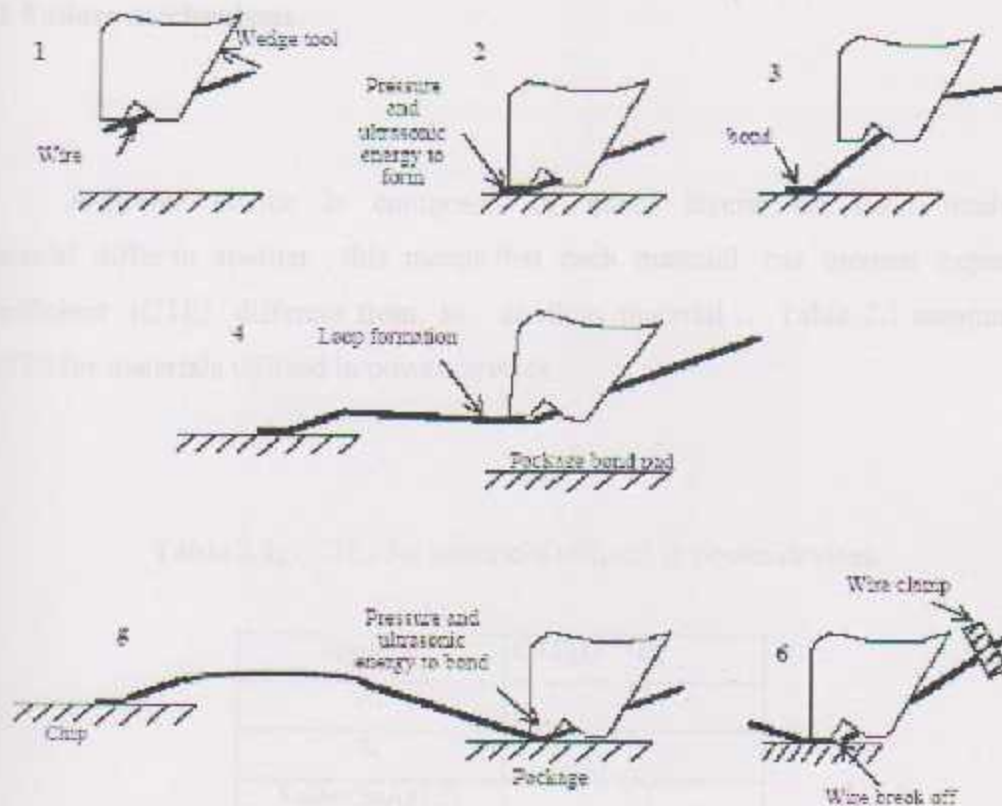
Steps for making ultrasonic wire bond between chip-bond pad and package.
